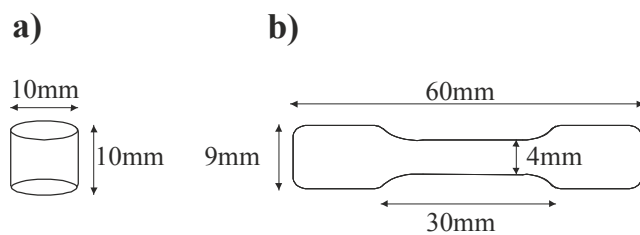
Specimen for the mechanical characterization: a) specimen for the compression tests, b) specimen for the tensile tests
